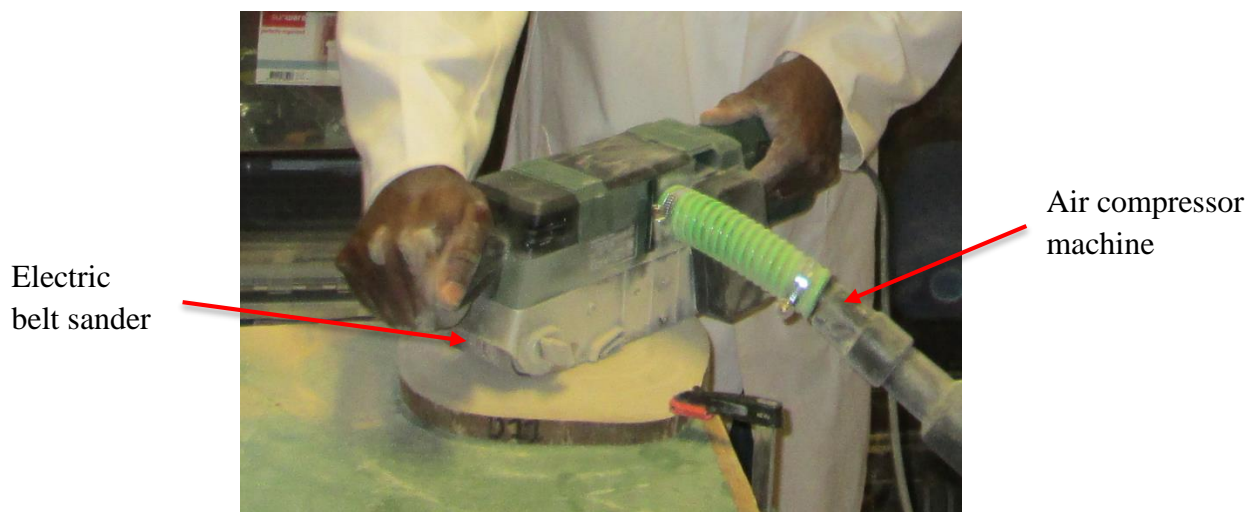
Disc surface polishing with an electric belt sander combined to an air compressor machine
